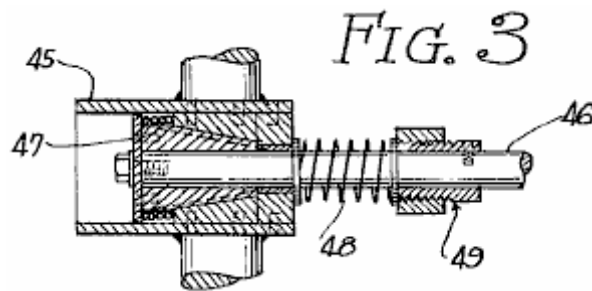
is a cross-sectional view taken along line 3-3 of Fig.2 showing the propeller linkage mechanism in the engaged position;
